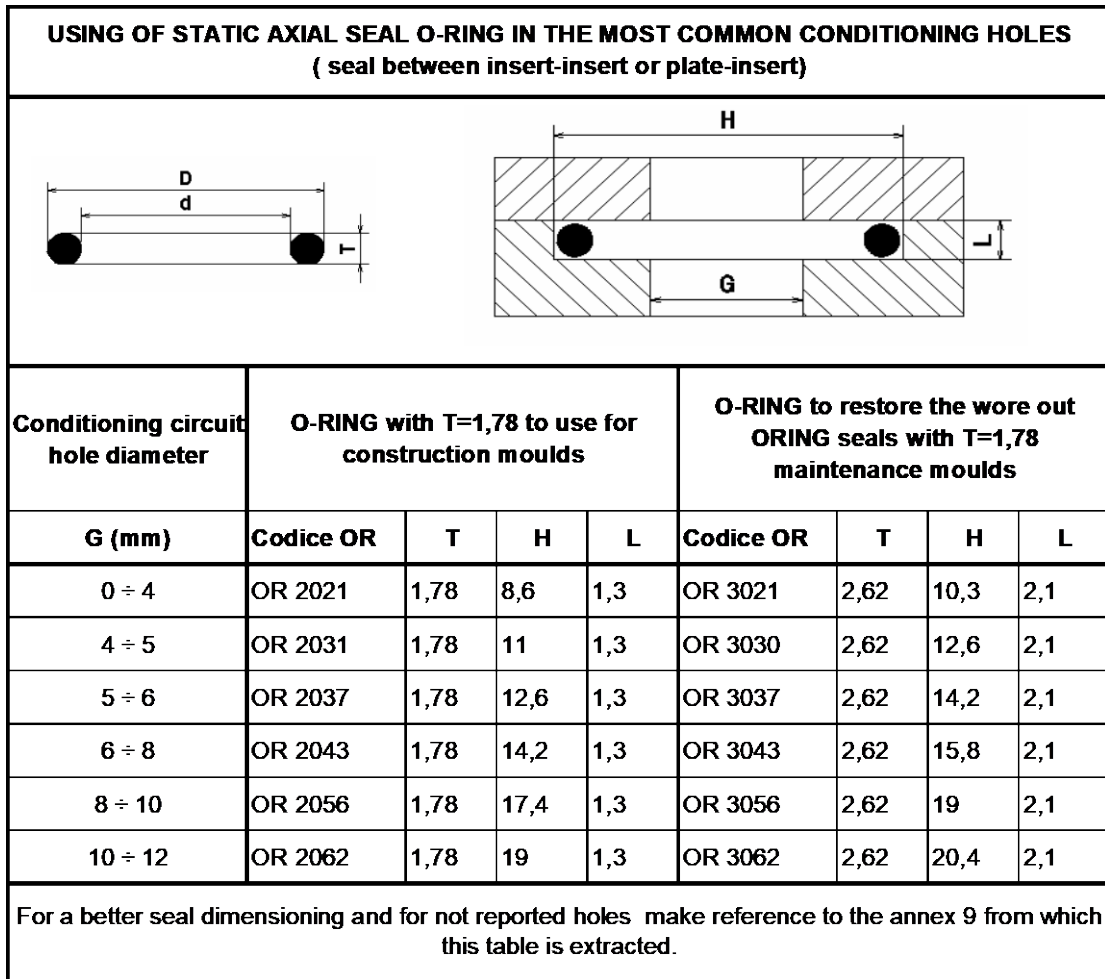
RING TABLE FOR CONDITIONING HOLES
